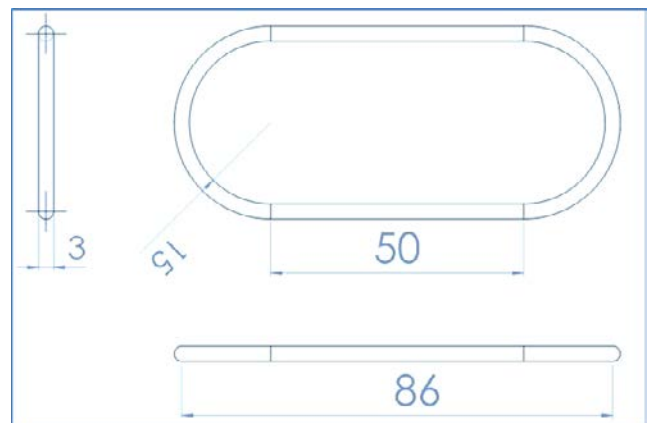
Schematic diagram of Single loop Pulsating Heat Pipe (All dimensions in mm)
